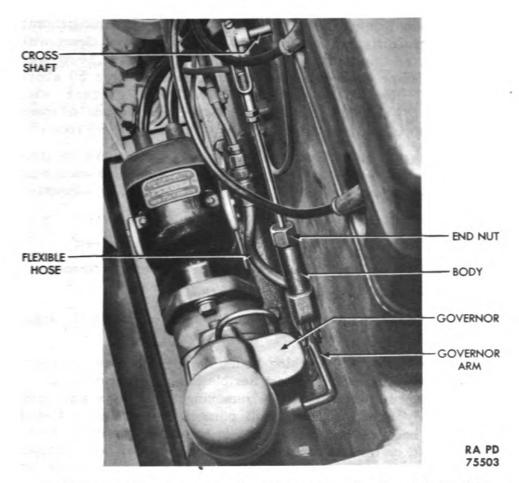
Compressor Engine Carburetor Slowdown Assembly
